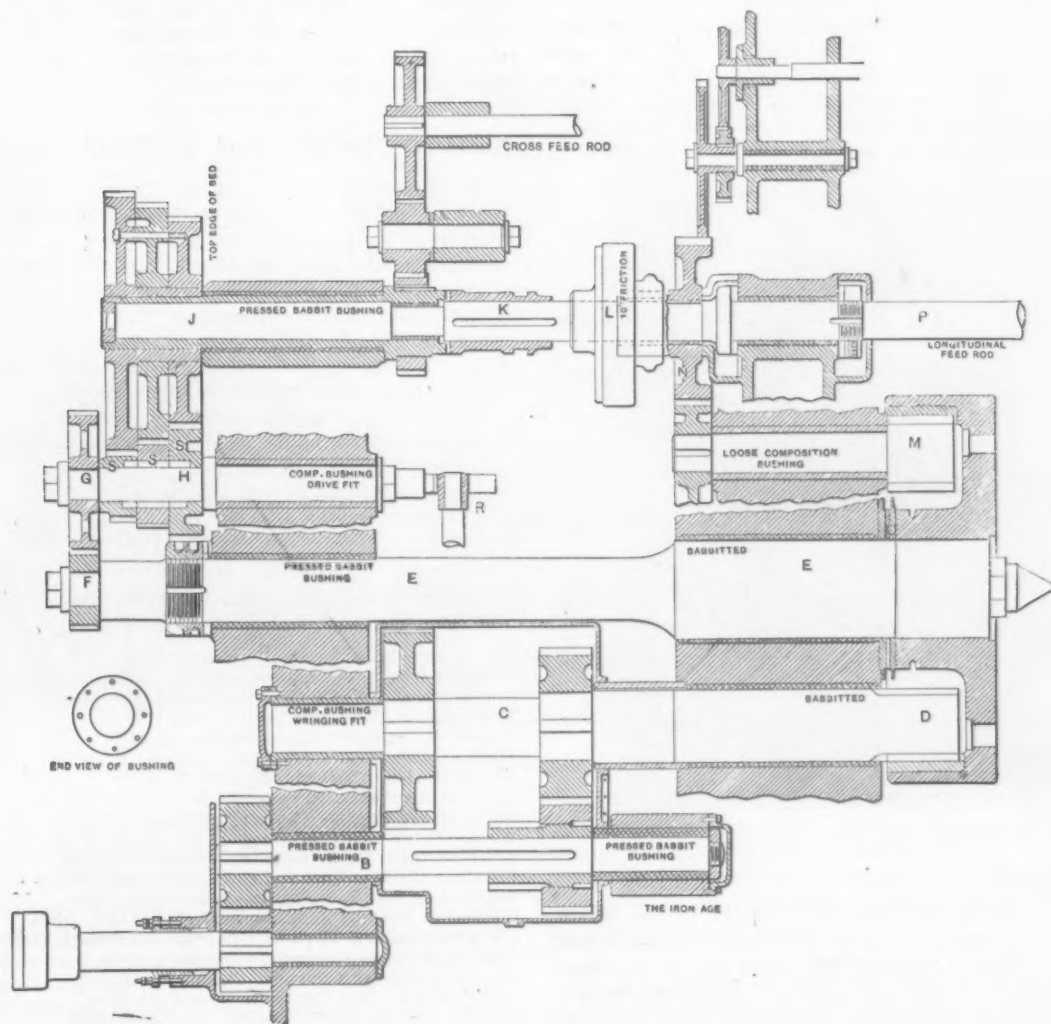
Development of the Gearing in the Head of the Putnam 32-Inch Lathe.
